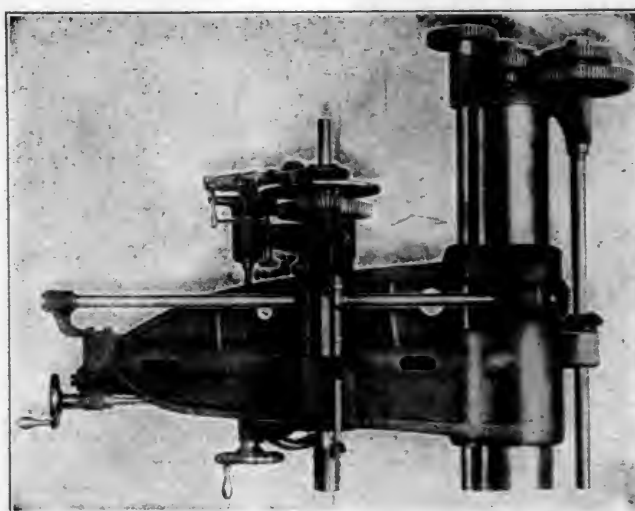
REAR VIEW OF HEAD UPON ARM, SHOWING DETAILS.
